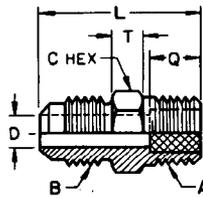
FUSIBLE REDUCING CONNECTOR (HALF UNION)
